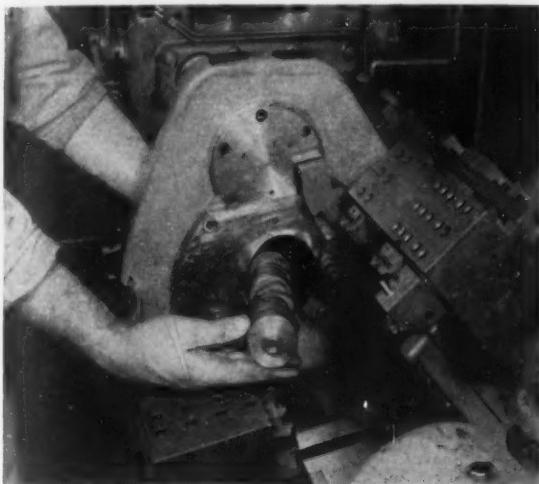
Removing crankshaft from automatic lathe. Center-drive attachment is shown from tailstock end.
